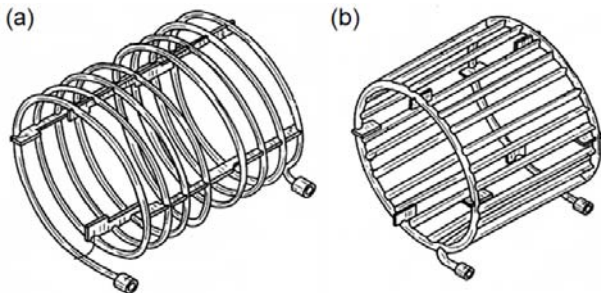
Liquid cooling jackets: (a) circumferential tubing; (b) axial tubing.
